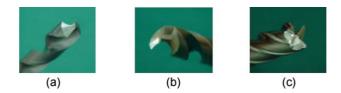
Photograph of three different type drills. (a) Twist drill; (b) candle stick drill; (c) saw drill.
